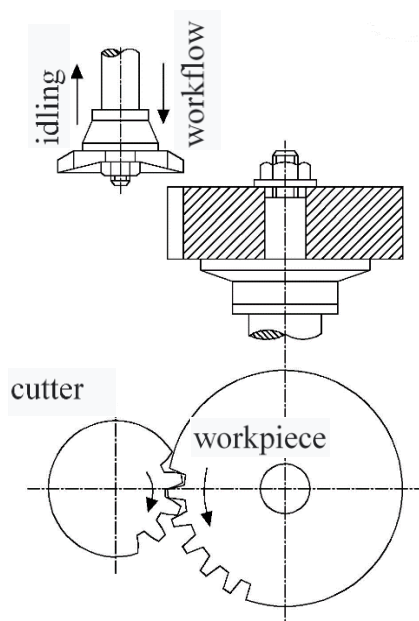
Cutting a wheel using the rolling method (tool – cutter)
